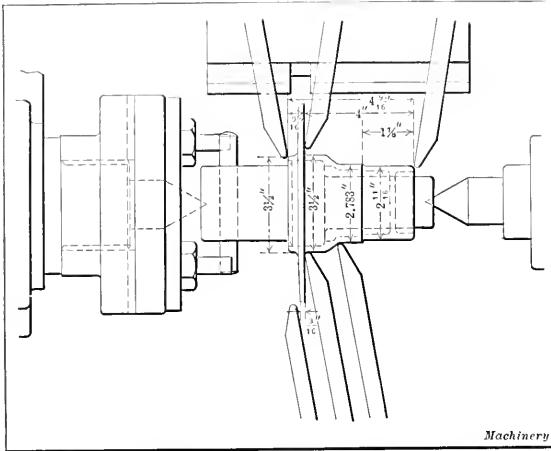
Machining a Wheel Hub on the Reed-Prentice Lathe
